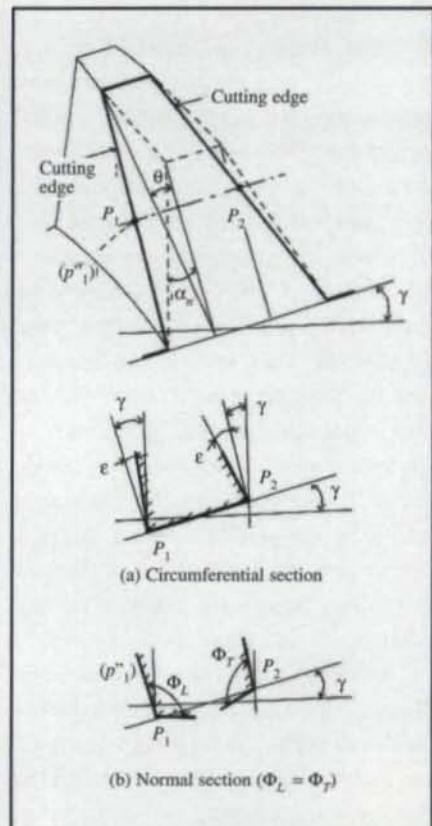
Tool angles of recommended skiving hob with a helical gash.
